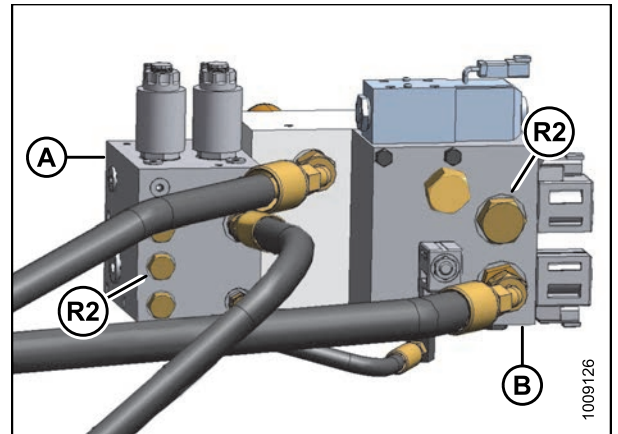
Valve Blocks with Reverser Valve in Factory Configuration
